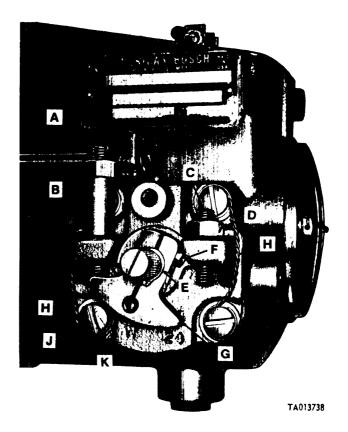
Removing adjustment screws, stop lever, operating shaft and associated parts.
